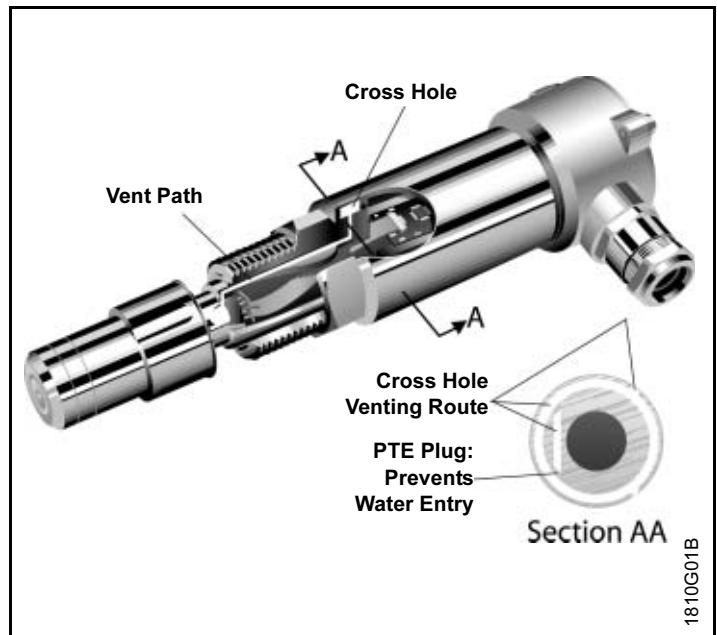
Rosemount 1810 Gauge Vent: An internal, machined path to reduce clogging and failure.
